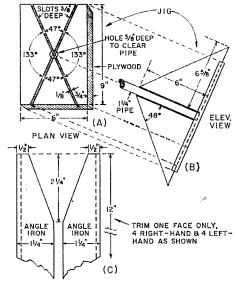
A—Dimensions of the jig base. B—Jig Assembly. C—Angle-iron spreader supports.
